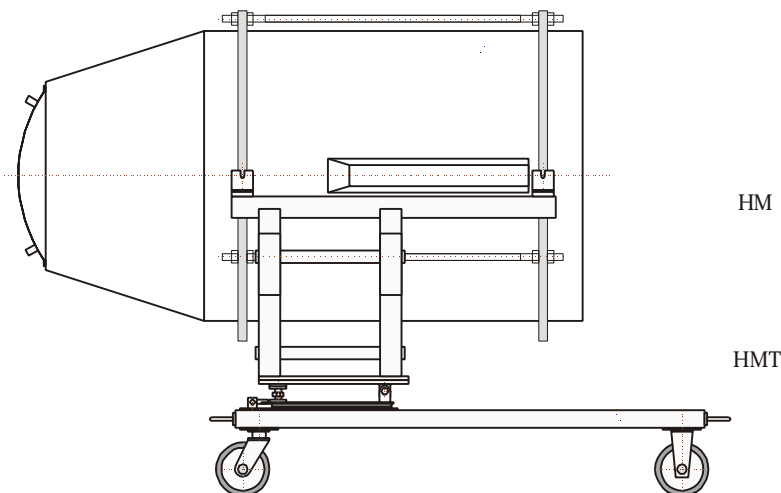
Head module preparation for checkout and transport to LV ATB
